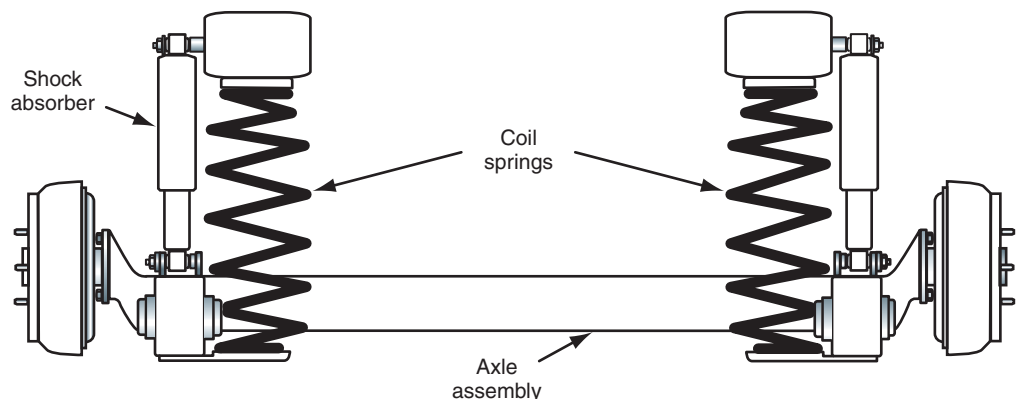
Live-axle rear suspension system with coil springs.
